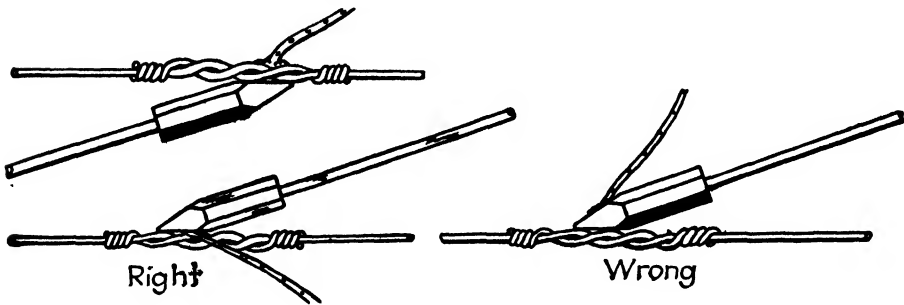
In soldering wire splices, heat the wires until they are hot enough to melt solder. Do not drop hot solder onto cold wire.
